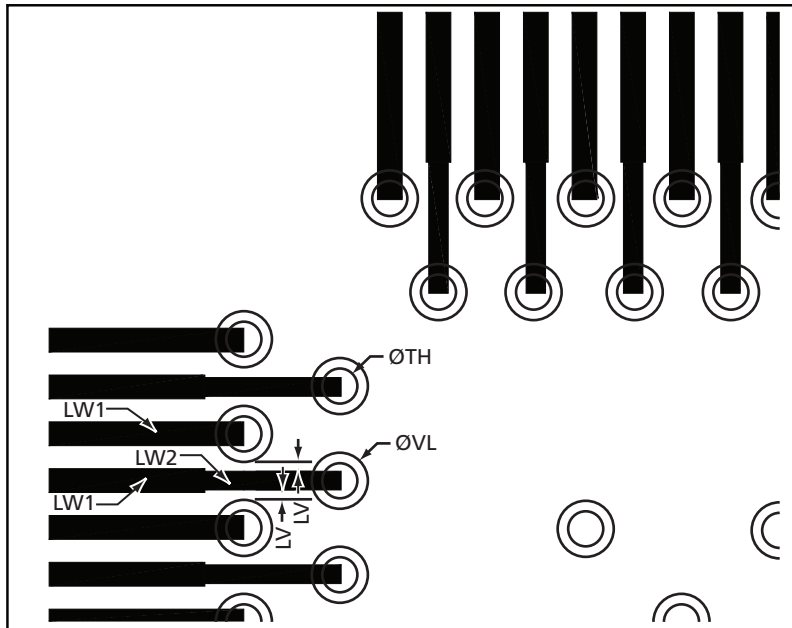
Suggested Board Layout of Soldered Pads for QFN (Bottom) Packages
